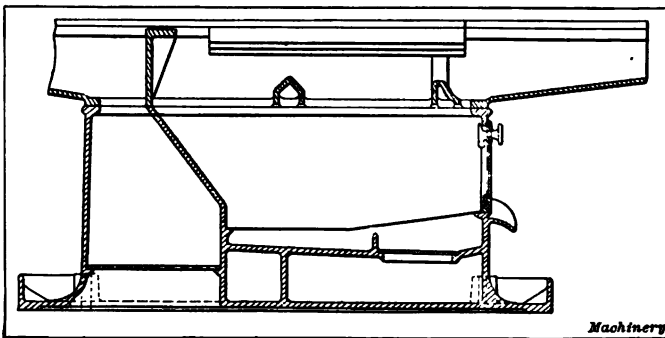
Hollow Base of Turret Lathe used for Receiving Chips and Lubricant
